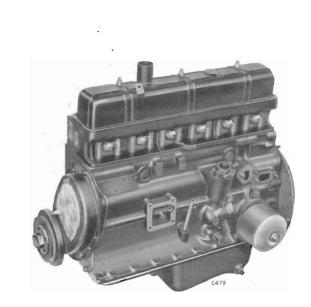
Left-hand front view of Vitesse reconditioned unit
